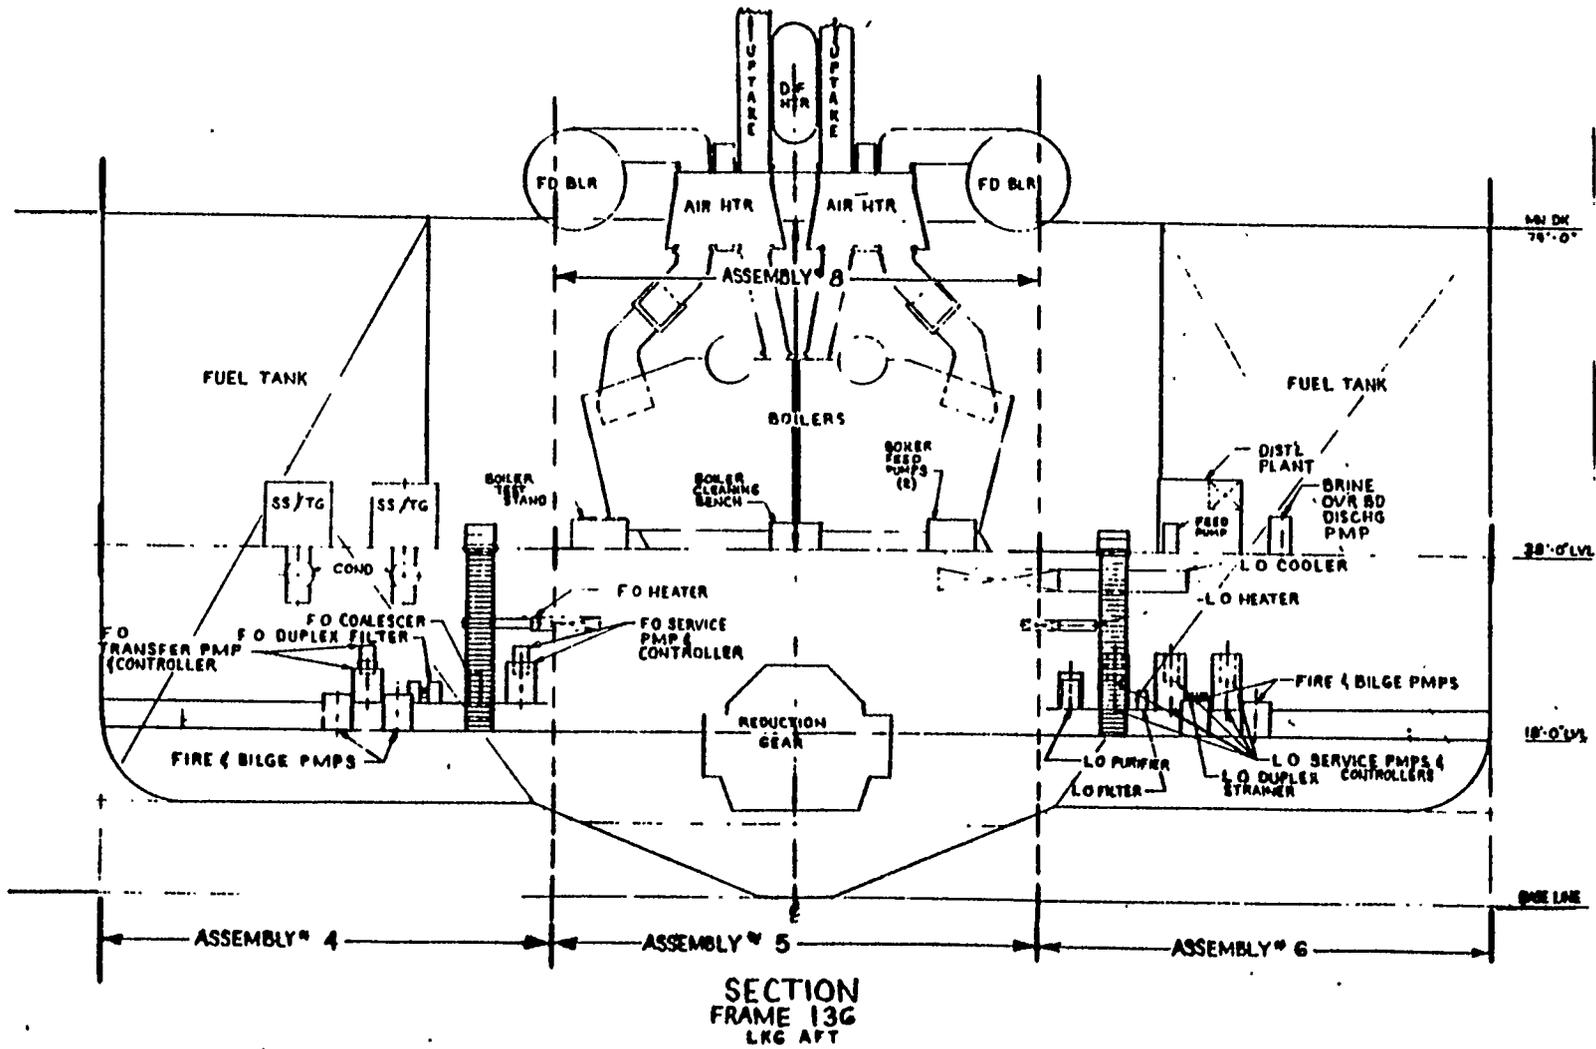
Steam Turbine Arrangement (Sheet 6 of 6)
